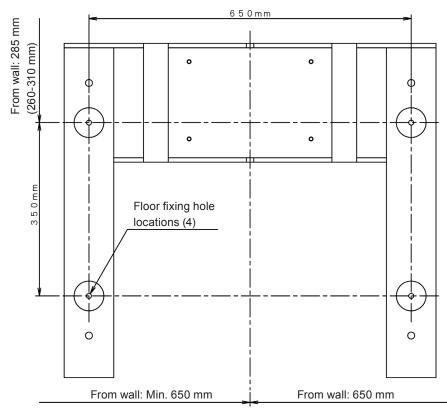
Floor fixing hole locations (base-mounted)
